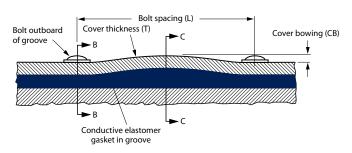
Section A-A of Assembled Enclosure Flange and Gasket (sectioned midway through gasket and groove)
